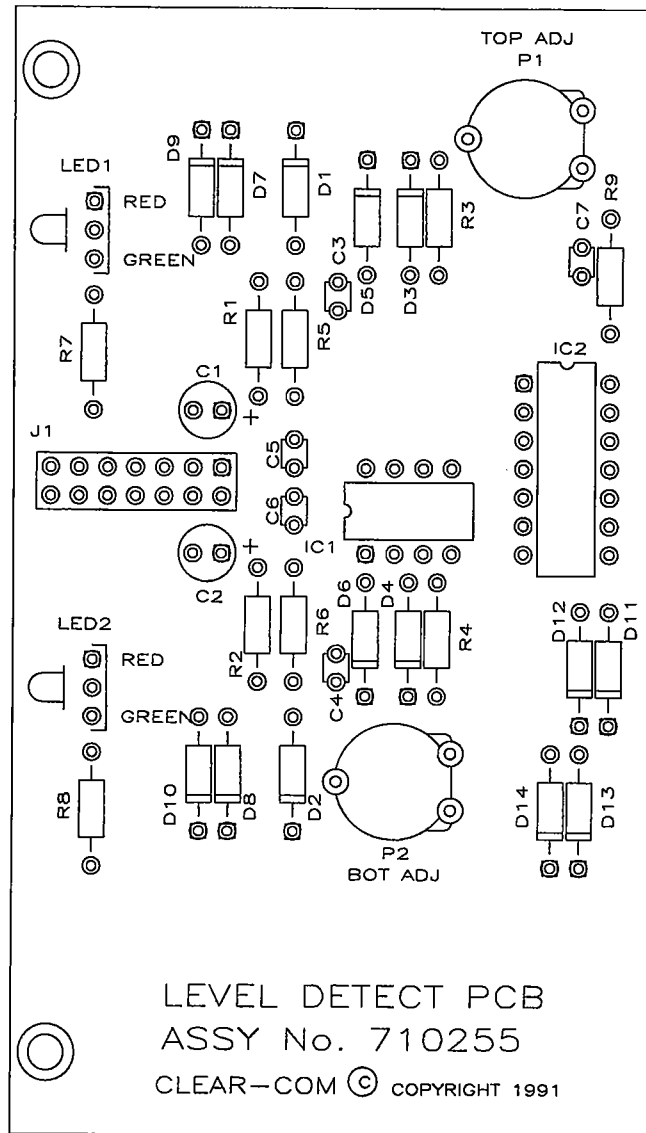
Assembly Drawing - FOR-22 Level Detect PCB, Rev. B
